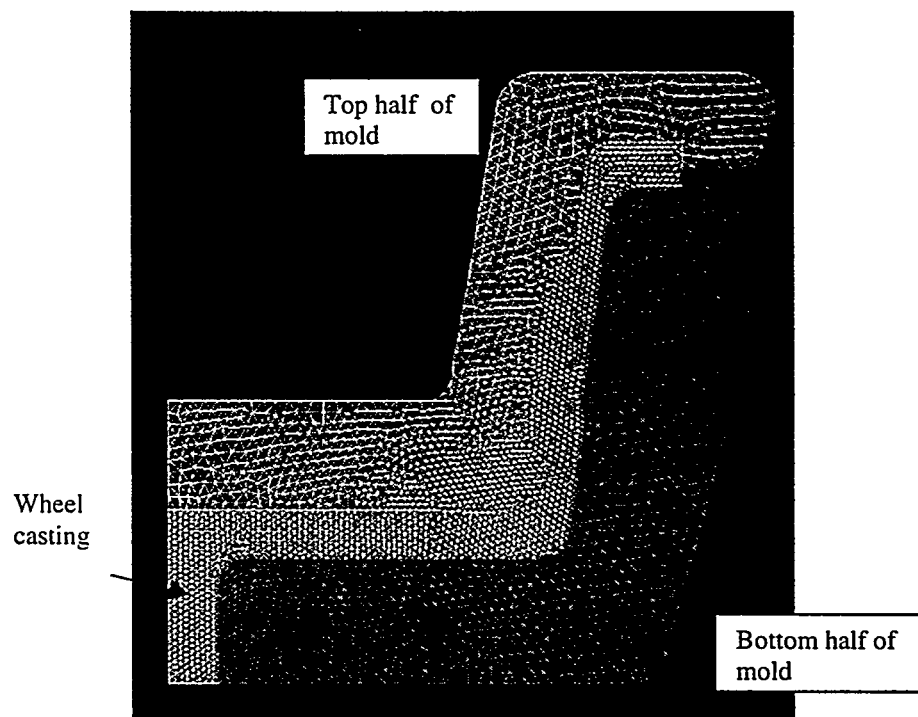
The mesh for the wheel casting with a top half mold and a bottom half mold
